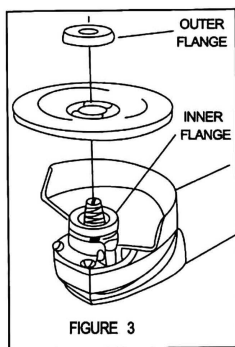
ET 3: FIXING THE WHEEL GUARD AND INSTALLING A WHEEL OR A DISC
